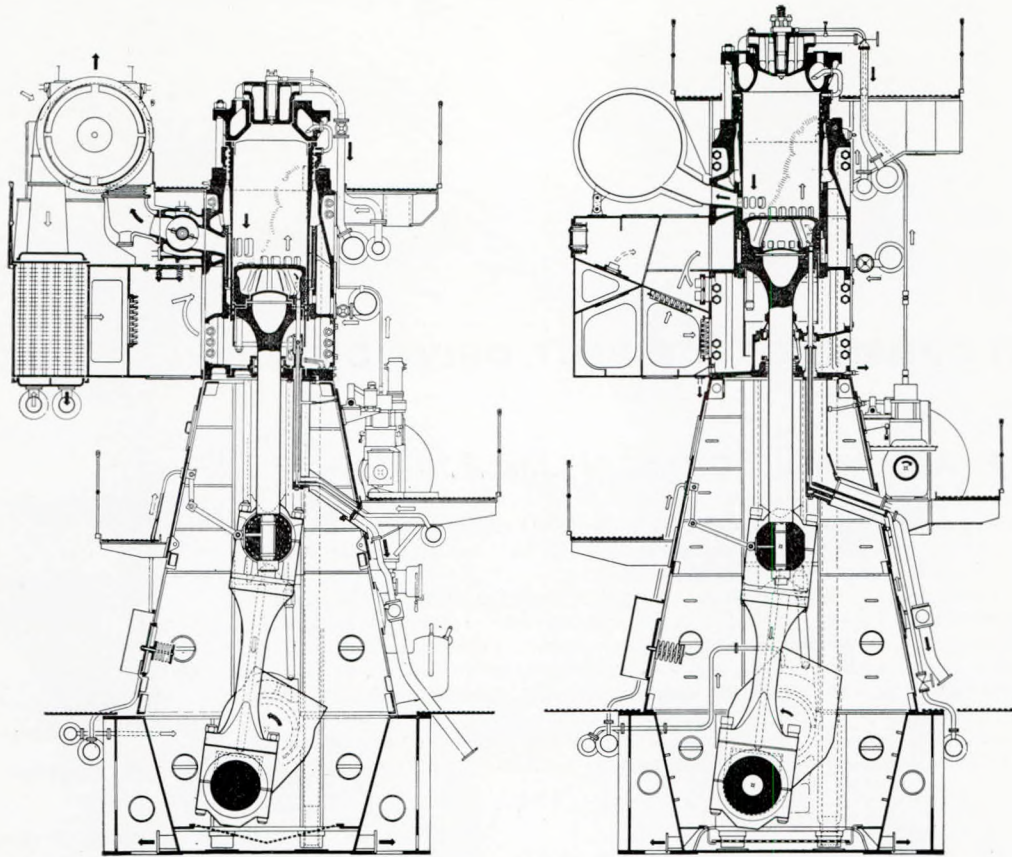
Cross-sections of RD90 engine (left) and RND90 engine (right)
